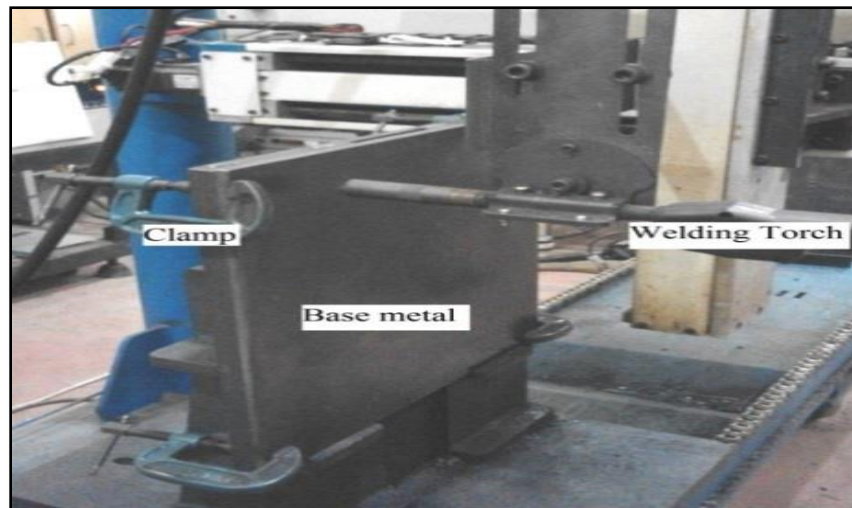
Welding fixture of base metal and welding torch.
